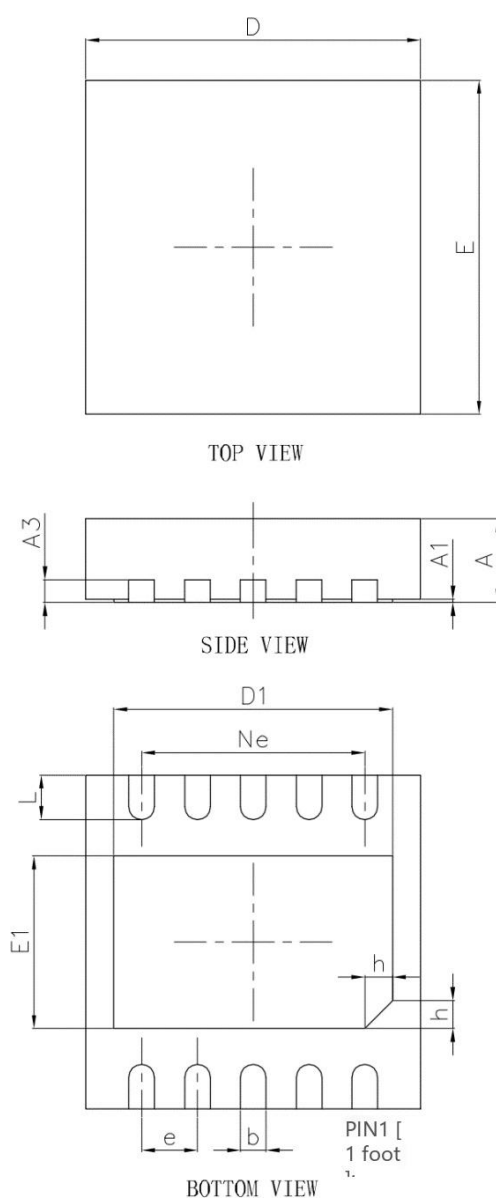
CD1005 DFN3×3-10L package dimensions
